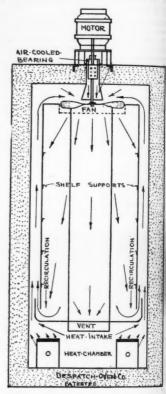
Cross-section drawing of Despute Convected Air Tempering Furnace, showing travel of air.
